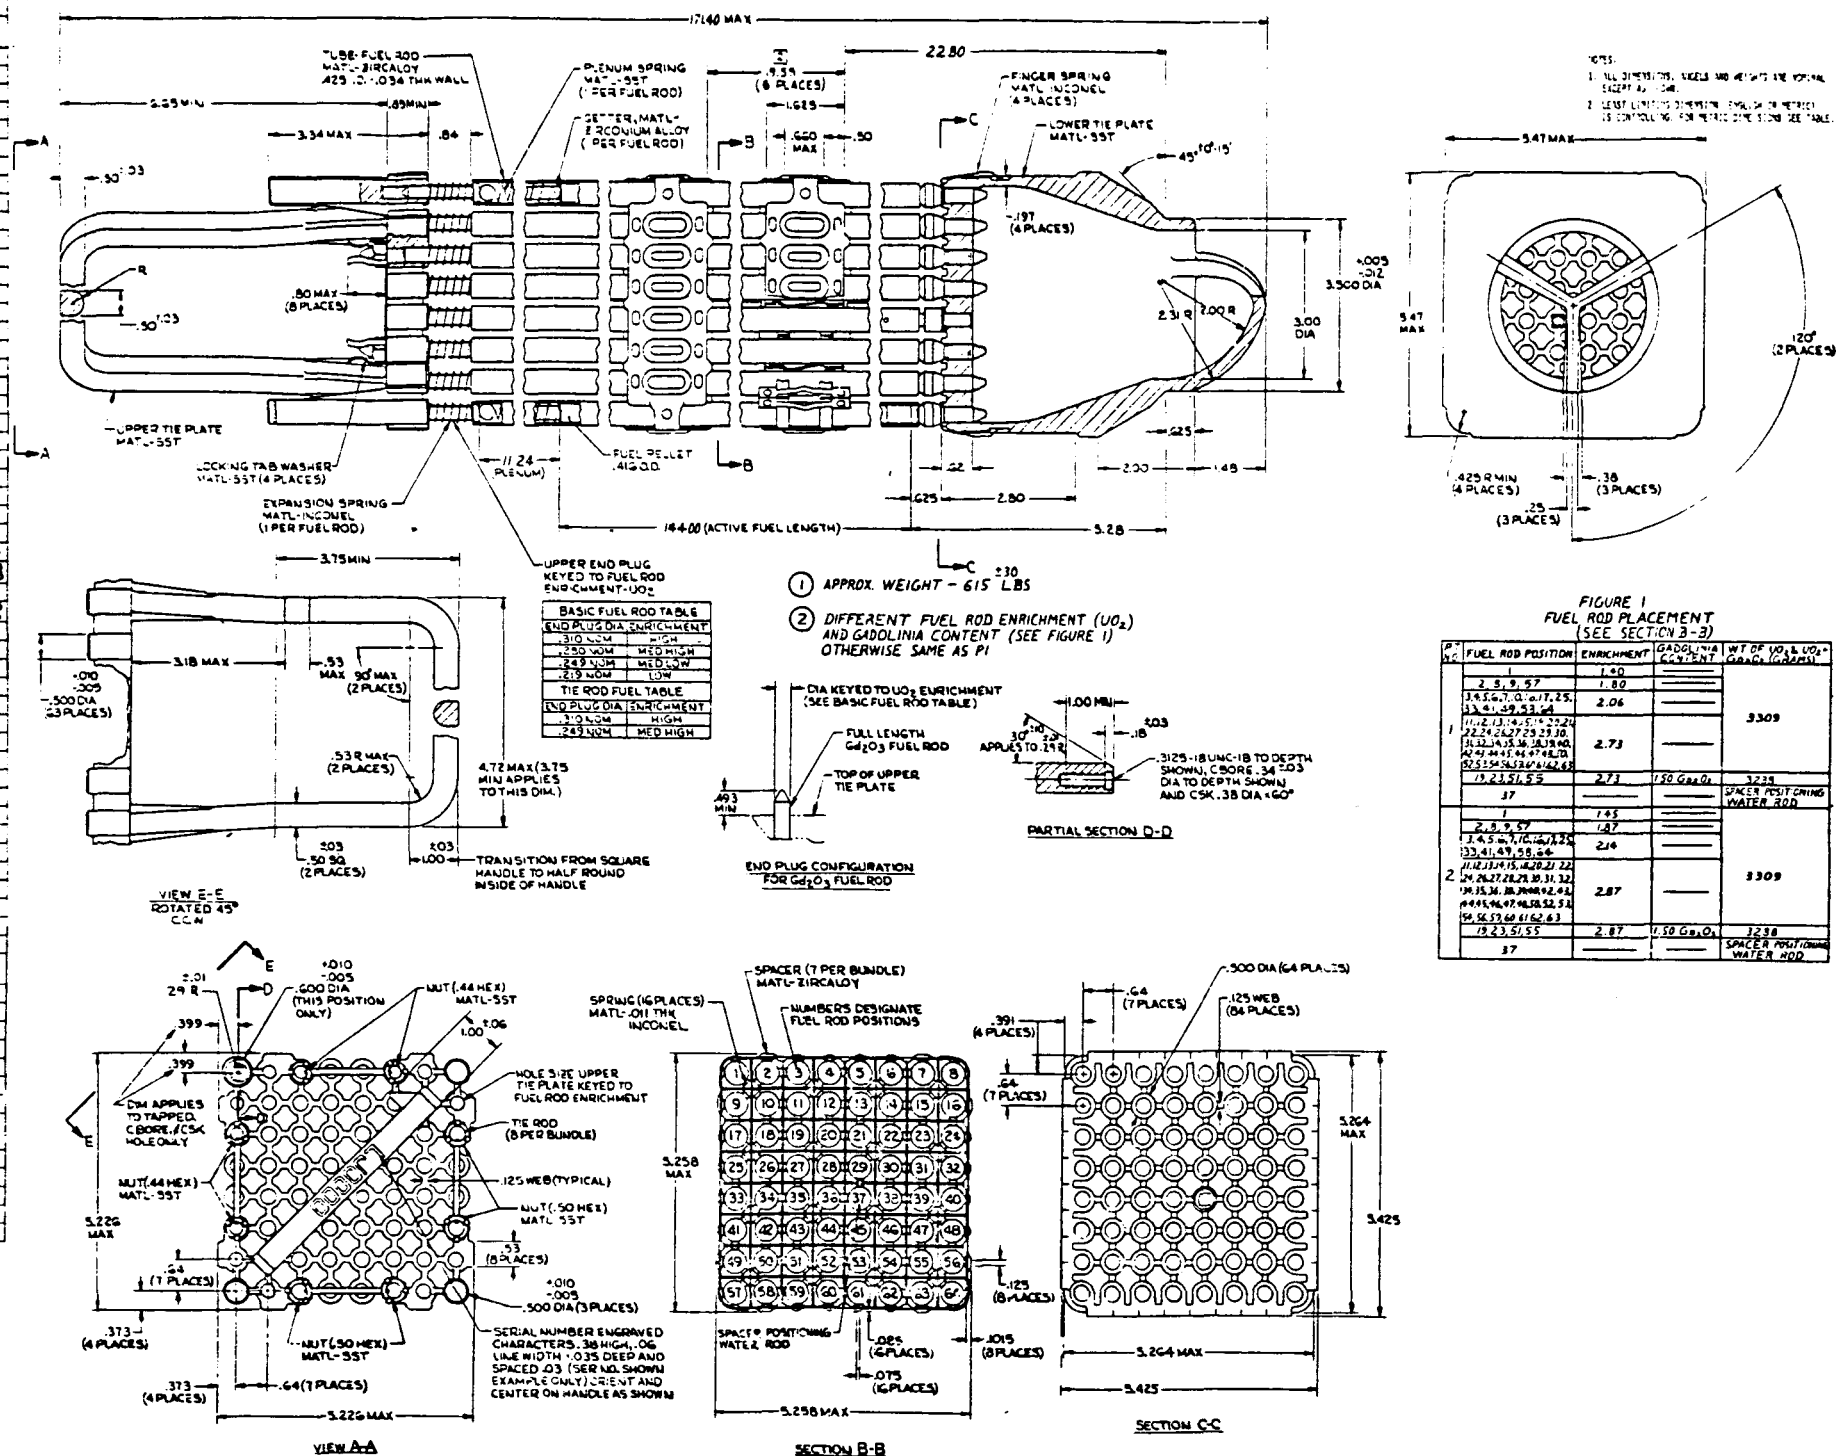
Fuel Assembly Drawing for 2.50% Enriched 8 x 8 Reload Fuel with Finger Springs
